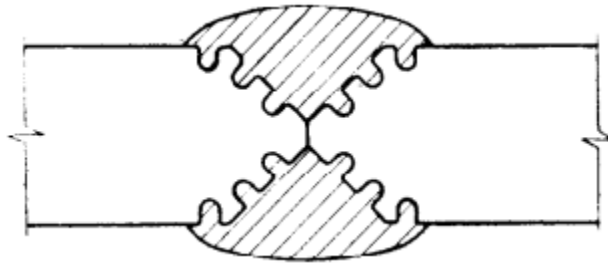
GROOVES INSTEAD OF STUDS IN WELDING CAST IRON
